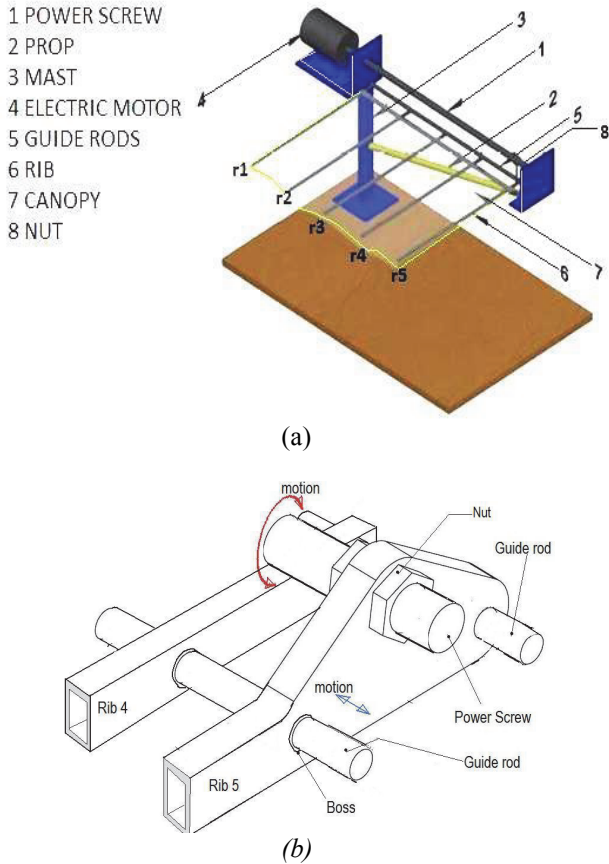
Conceptual sketch of the retractable carport canopy (a) and the details of the screw mechanism (b).
